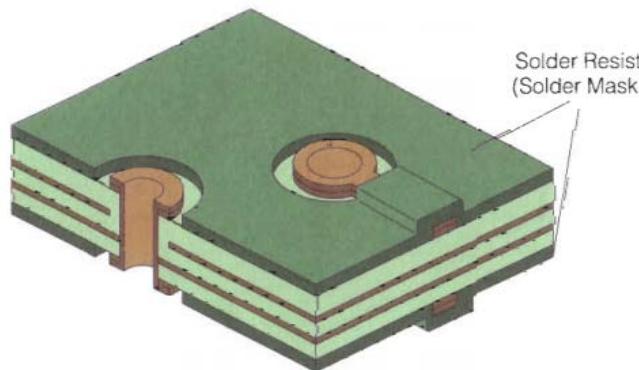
Apply solder resist. The specified resist (either dry film, liquid photoimageable, or screen printed) is applied to the surfaces of the PCB or panel.
